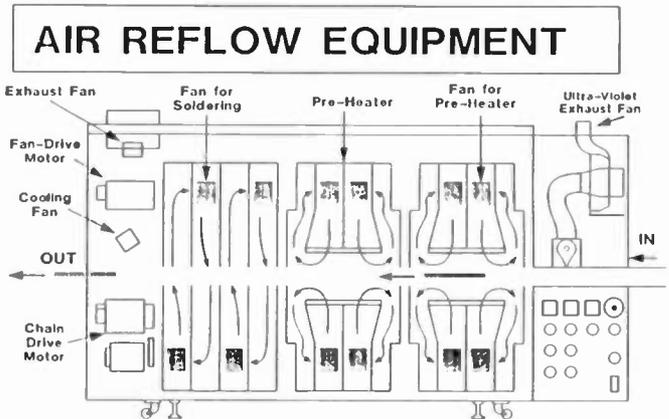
AIR REFLOW SOLDERING SYSTEM FOR DOUBLE SIDE COMPONENT MOUNTING.
